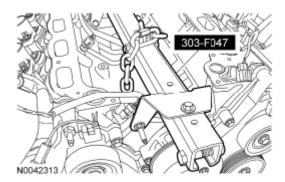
Installing Engine Lifting Bracket Courtesy of FORD MOTOR CO.
